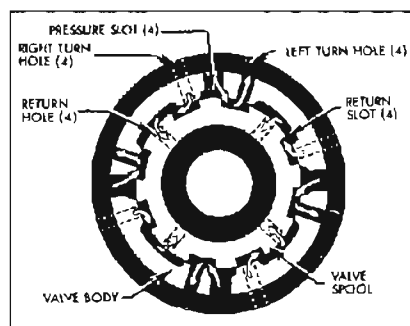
Rotary Valve—Left Turn (Upper End View)
